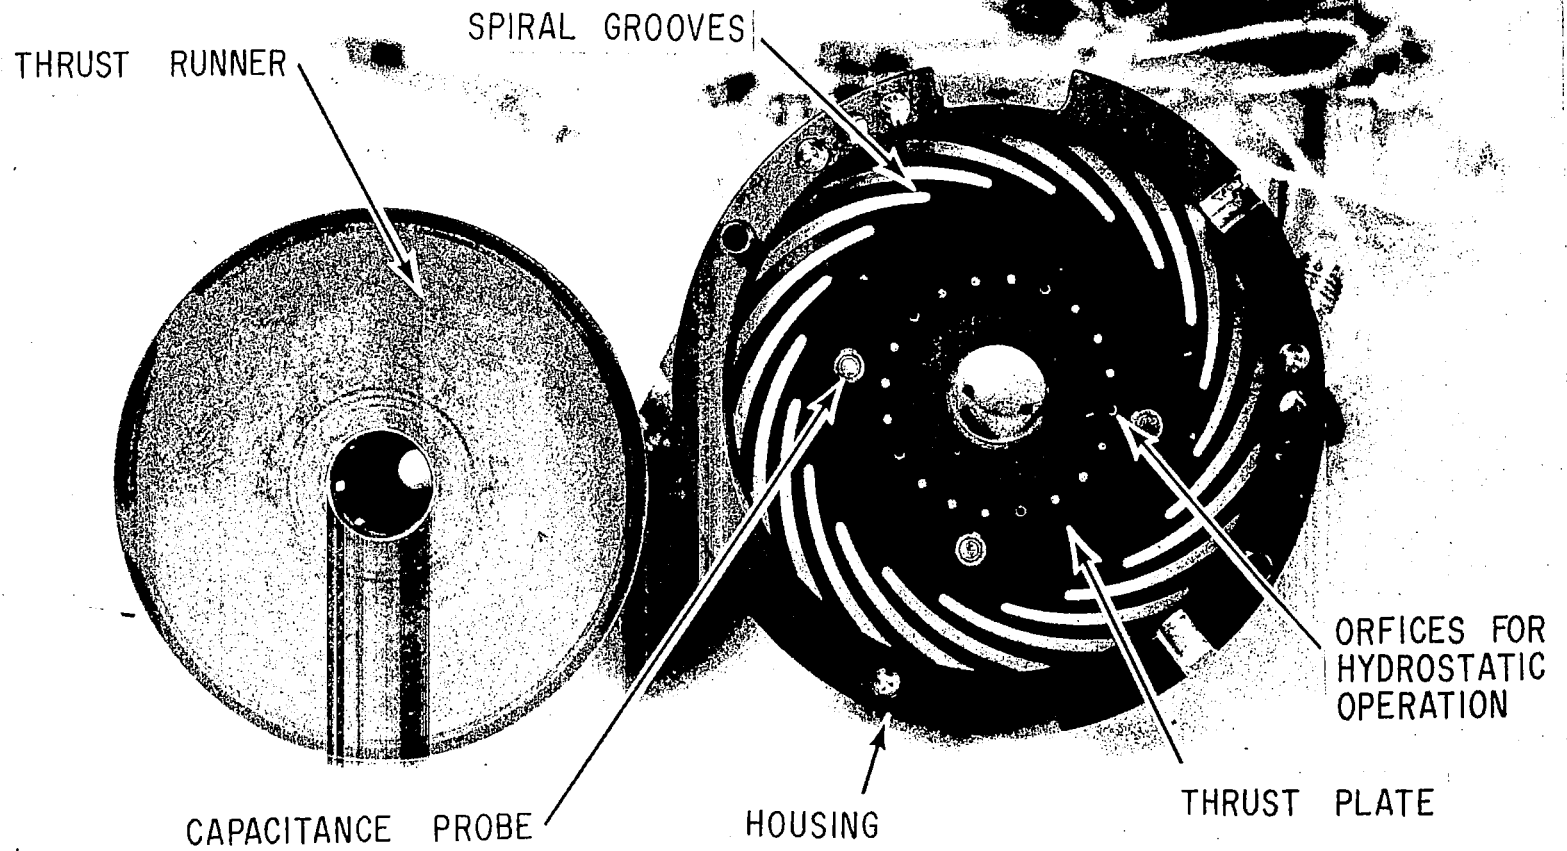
Photograph of the Simulator Forward (Primary) Thrust Bearing
